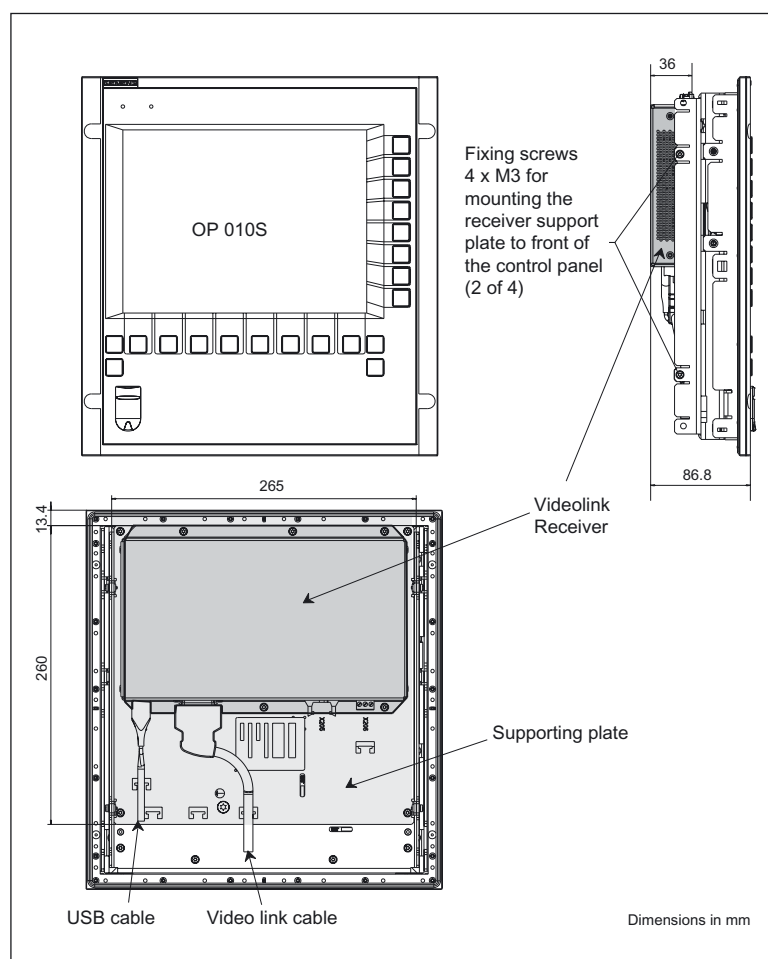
Front, side and rear view of operator panel front OP 010S with screwed-on videolink receiver
